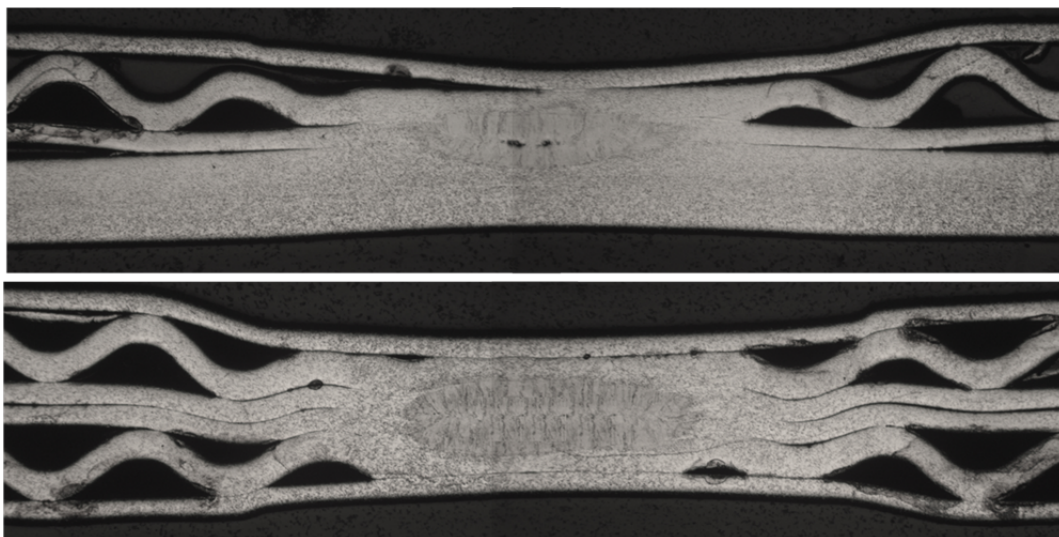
Dissimilar (above) and similar (below) resistance spot welding of the sandwich.
